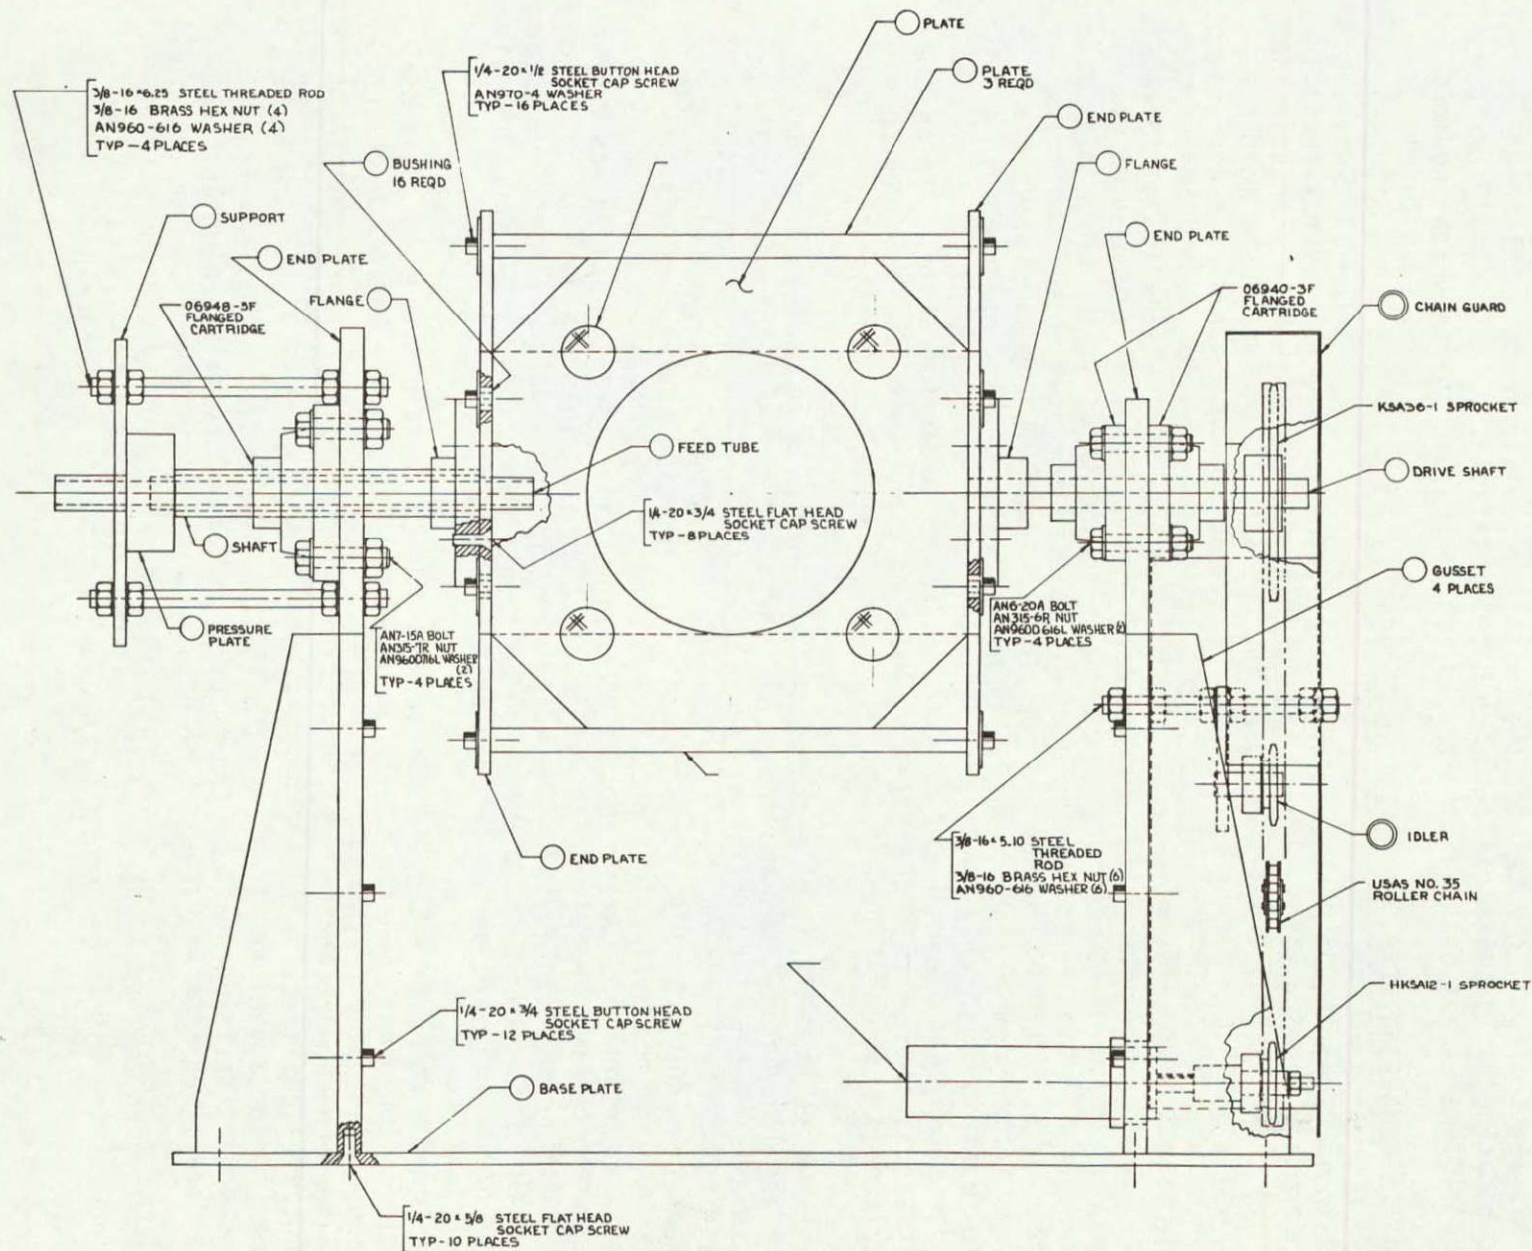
DESIGN DRAWING ROTATING MOLD FACILITY
